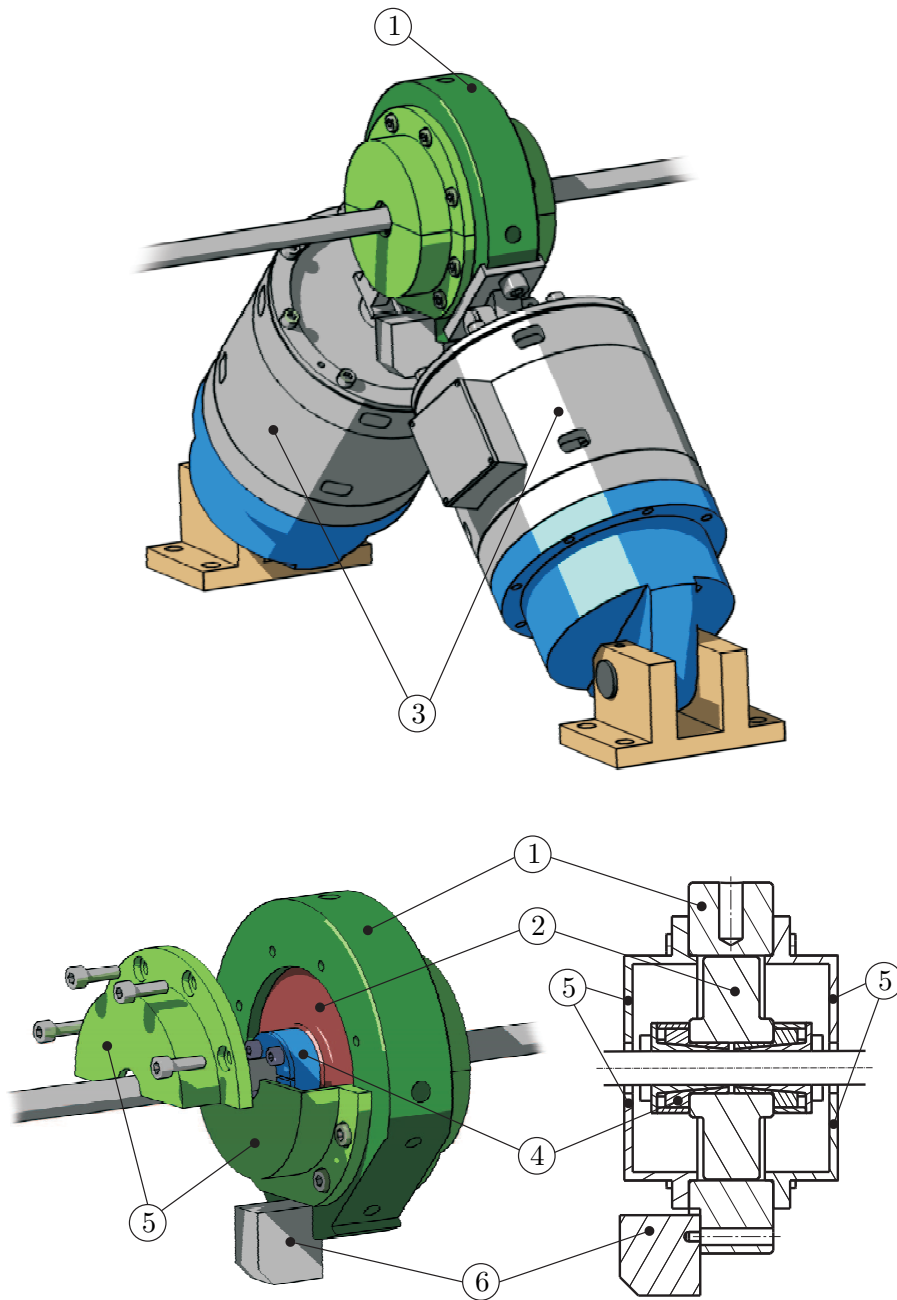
Detailed drawing of the active auxiliary bearing; 1: auxiliary bearing (ring); 2: disk, which is fixed on the rotor shaft; 3: electromagnetic actuators; 4: clamping set; 5: housing, which allows to fill the auxiliary bearing with a lubricant; 6: accelerometer
